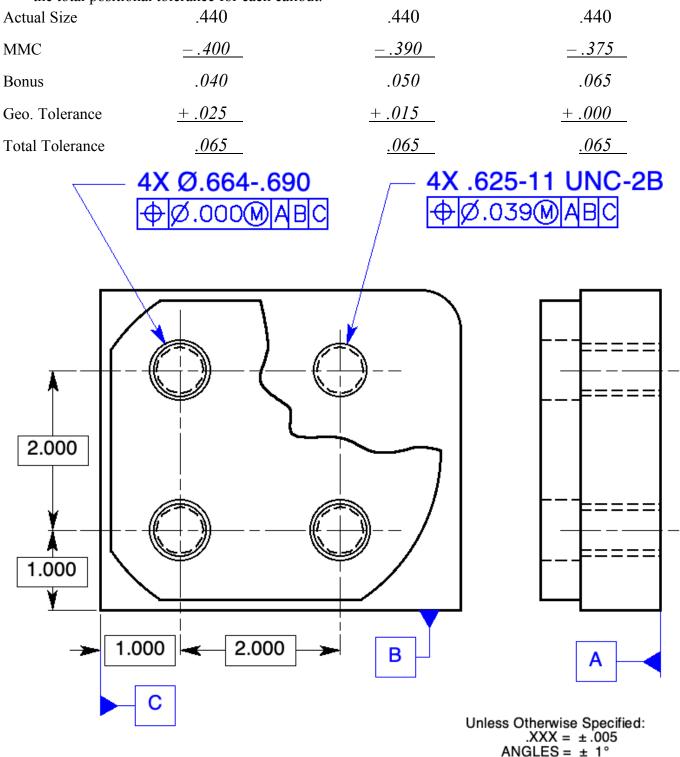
Fixed fastener tolerance: Prob. 6.
